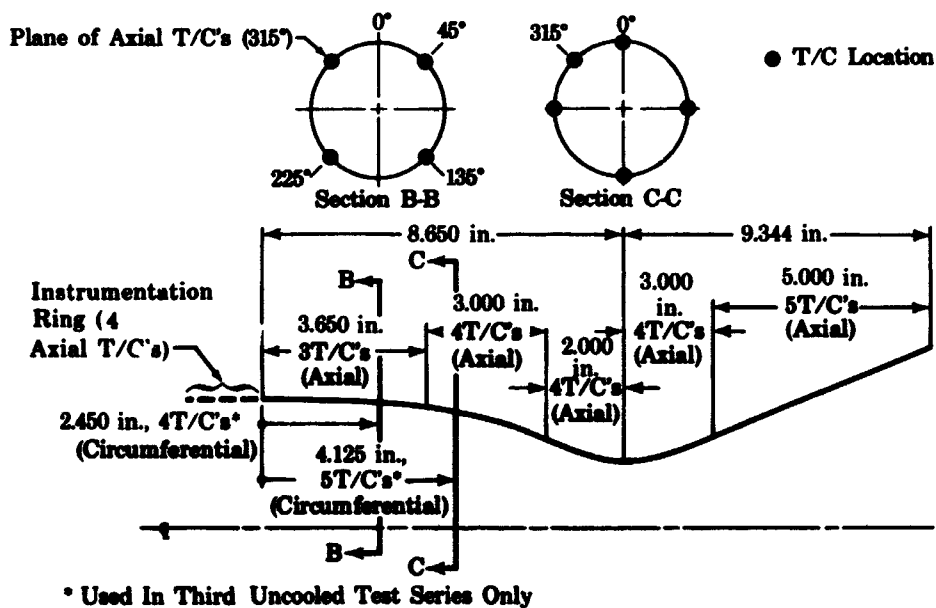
Location of Axial and Circumferential Skin Thermocouples on Uncooled Thrust Chamber
